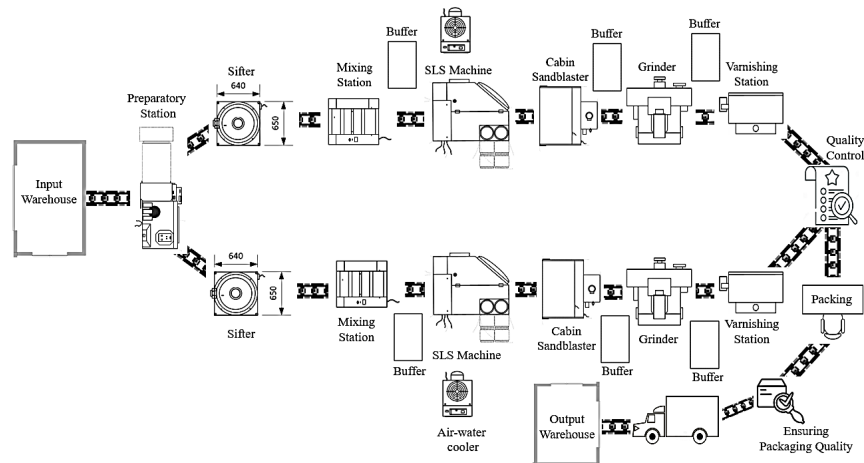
Exemplary Layout Plan for 3D Printing machines and devices, modified from [13].
